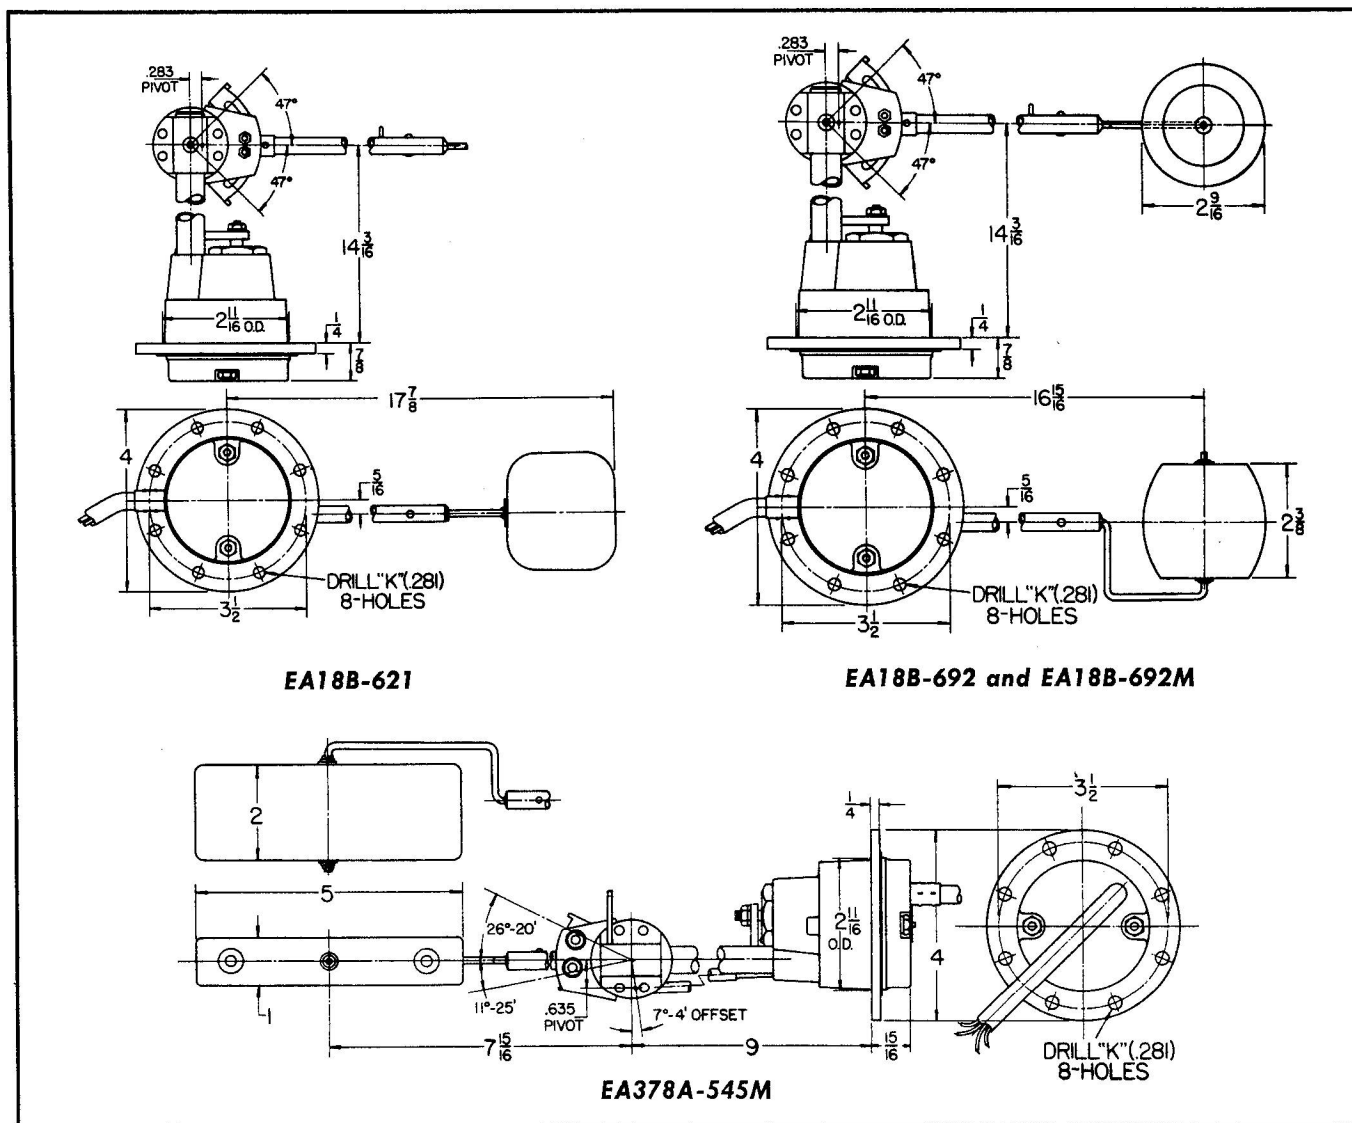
(Sheet 1 of 2 Sheets). General Dimensions
